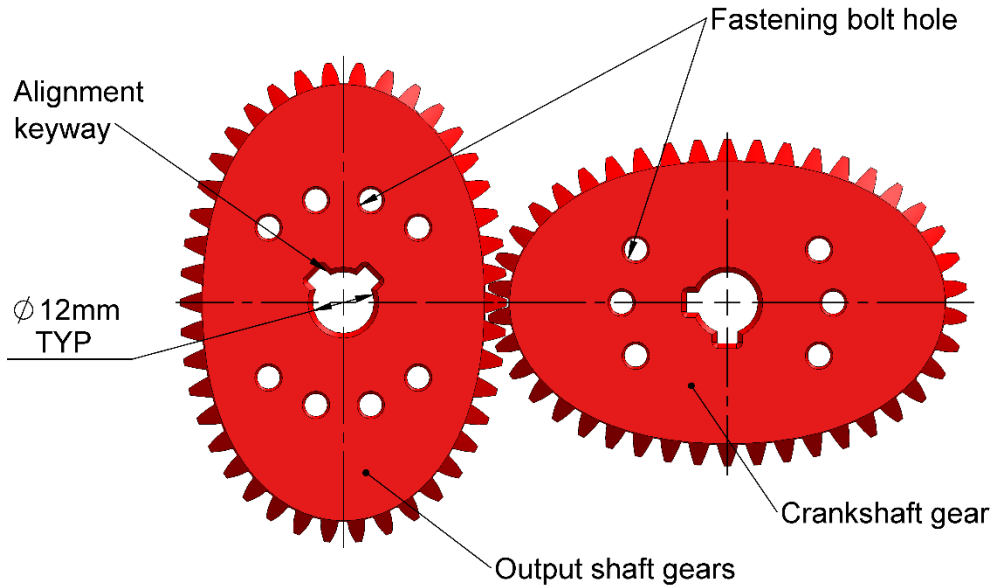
Solid model of the $e = 1/5$ eccentric gear pair for the displacer crank
